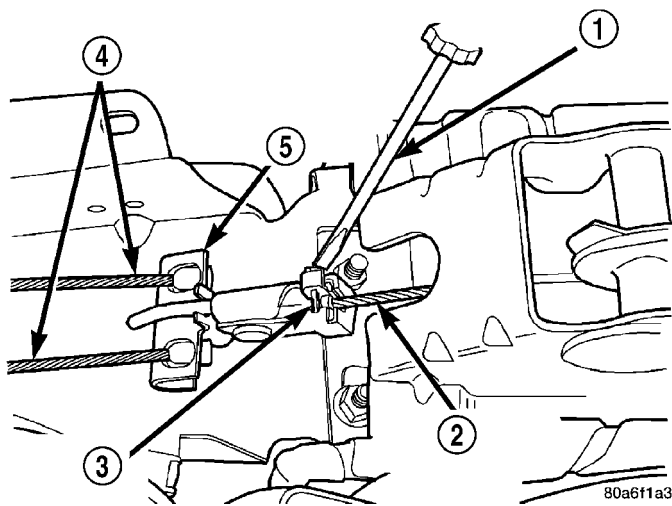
Output Cable-To-Equalizer Retaining Clip
